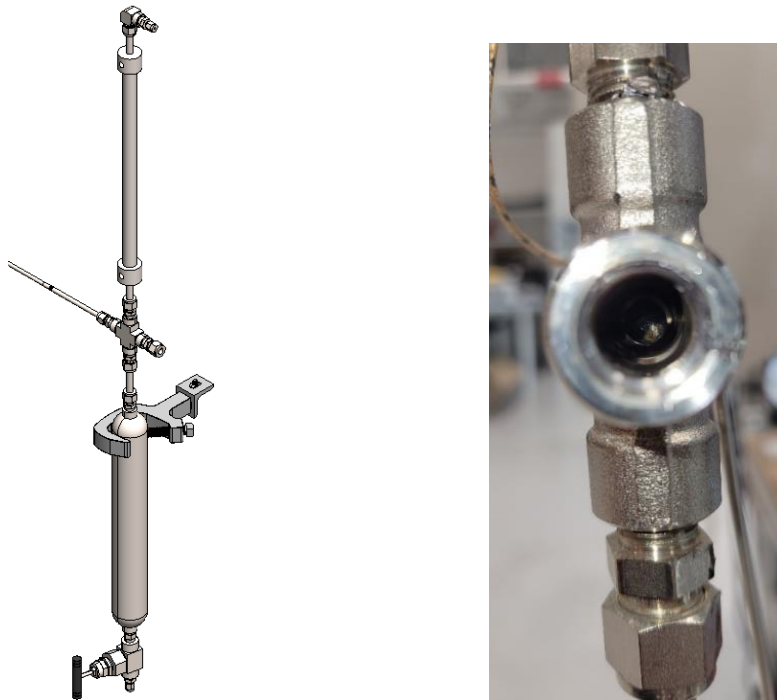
SolidWorks Condenser gas separator assembly (Left) and picture of thermocouple inside (Right)
